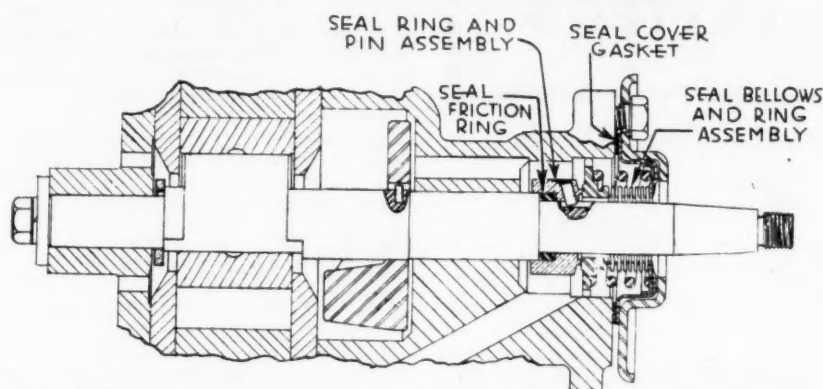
Details of shaft seal and cover used on Norge rotary compressors.
